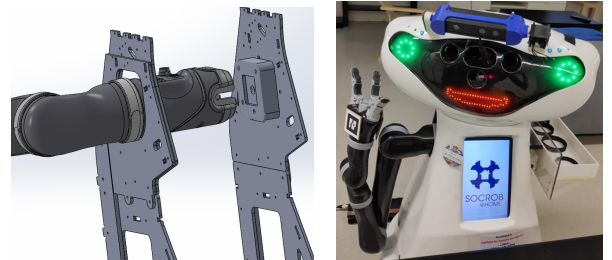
Left: Arm assembly with modified side-plate and new mounting fixture. Right: final result
